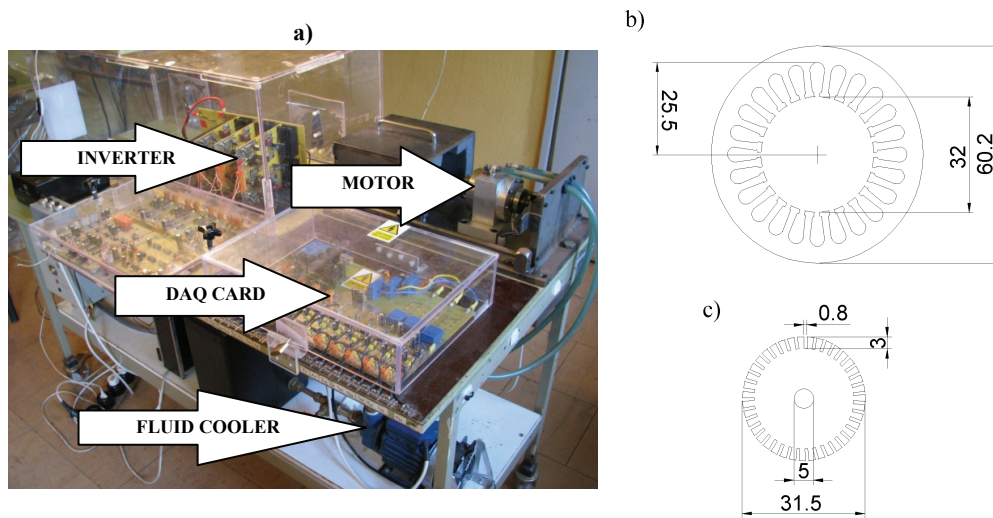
Laboratory test-stand a), stator b) and rotor c) of the considered motor with dimensions
